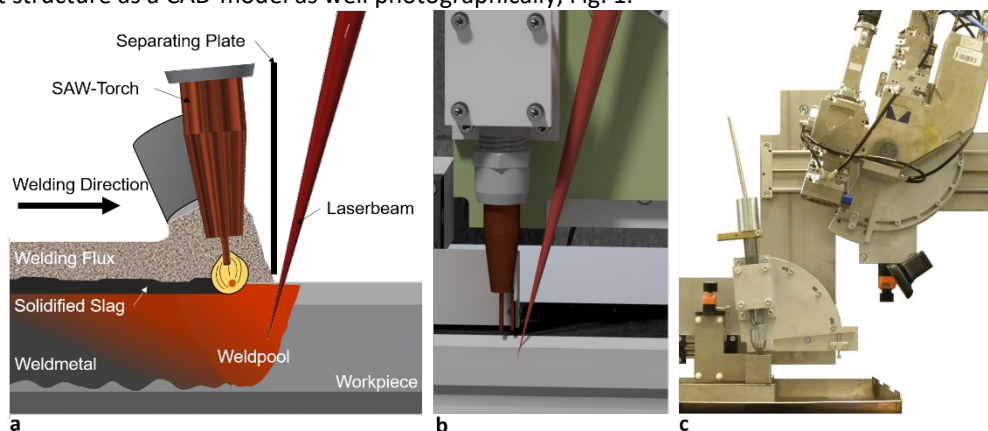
(a) process zone, schematic; (b) process zone, CAD-Model; (c) hybrid welding head
